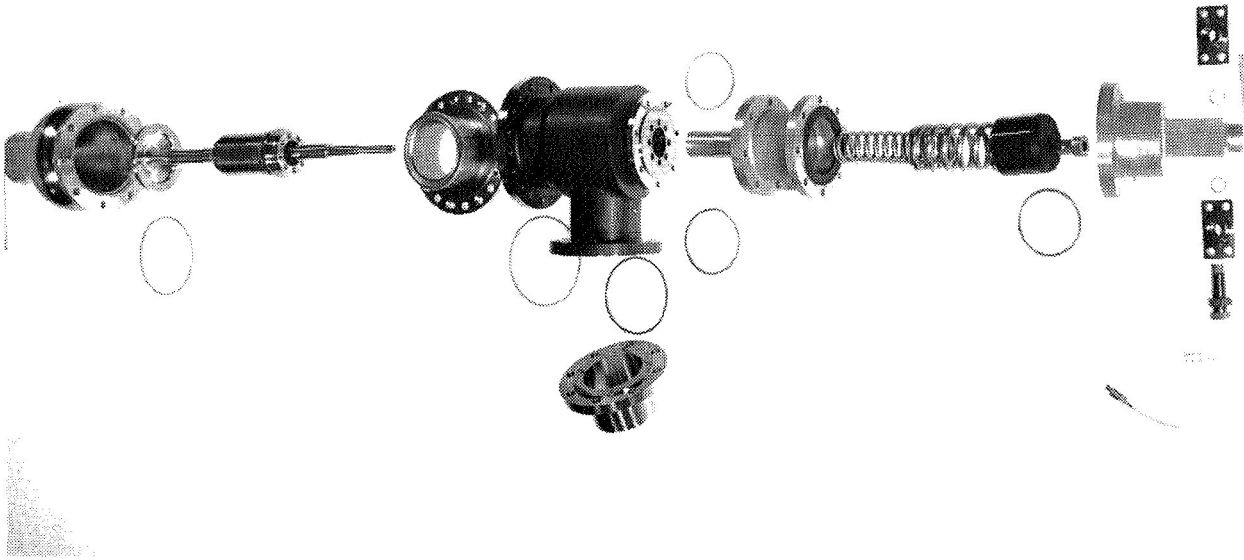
Space-Storable Oxidizer Valve (Disassembled)
